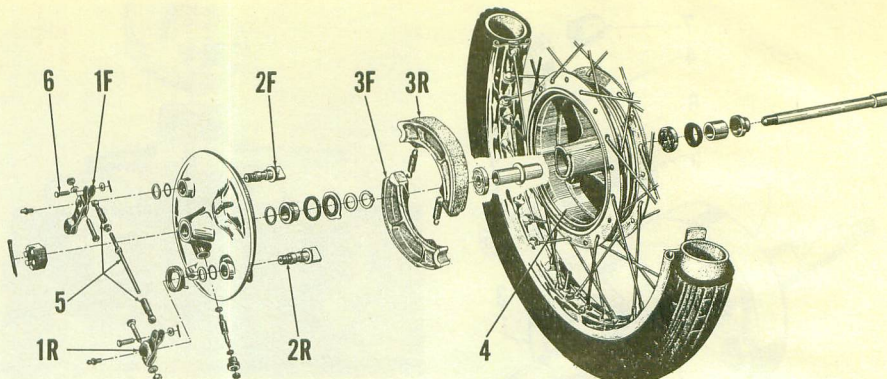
Exploded view of dual cam (full self-energizing) front brake assembly. This type is used on rear on some models. Front lever (1F) is actuated by hand control lever and turns cam (2F) expanding brake shoe (3F). Rod (5) connects the two levers together so that rotation of lever (1F) will also rotate lever (1R).
